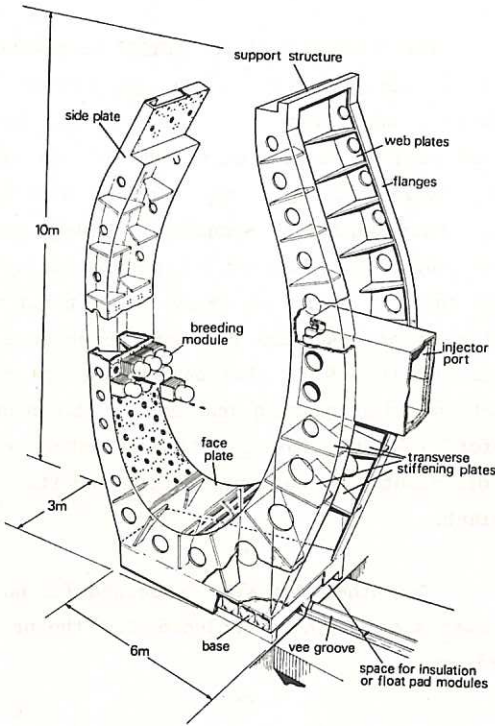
Support structure of interchangeable blanket segment showing mounting of blanket cells, alignment system and injector port.
